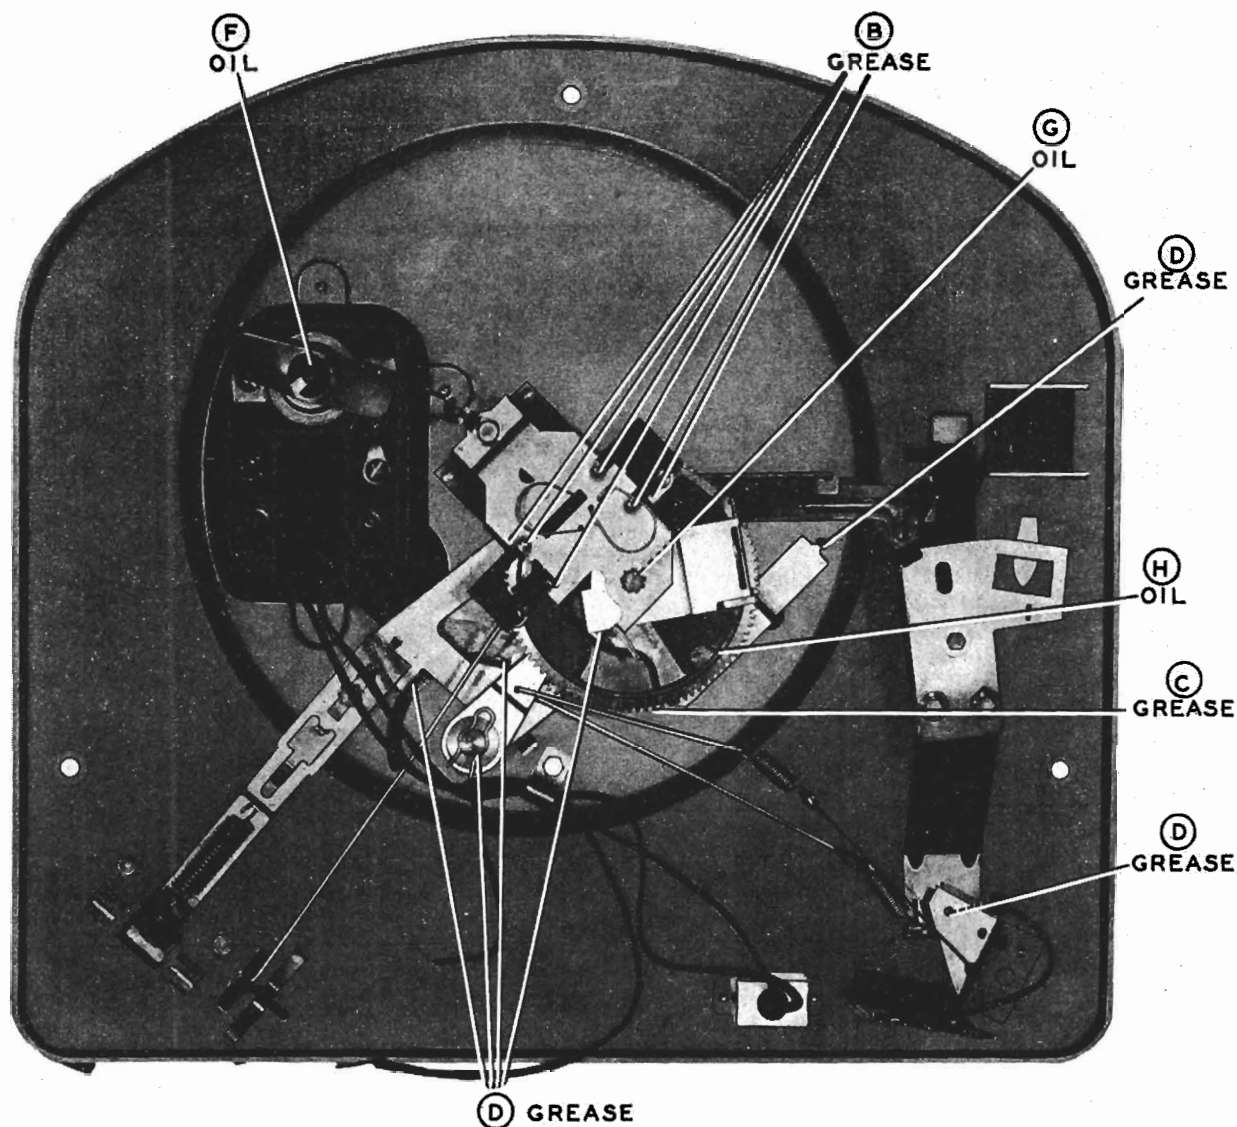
BOTTOM VIEW OF CHANGER, SHOWING LUBRICATION POINTS
